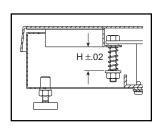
10" and 12" Checkweigher base in 6-60 lb capacities
